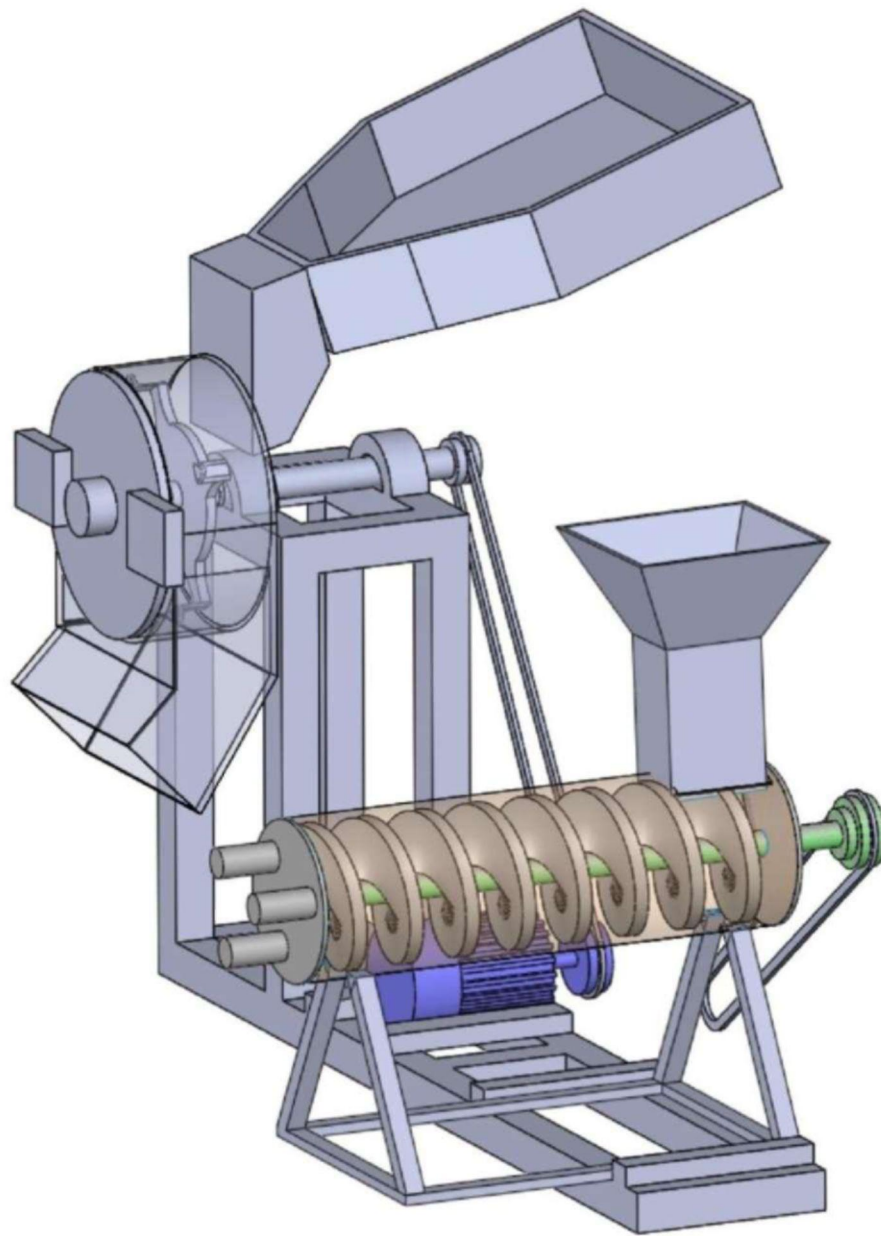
Isometric view of shredder cum Briquetting Machine in Solid Works
